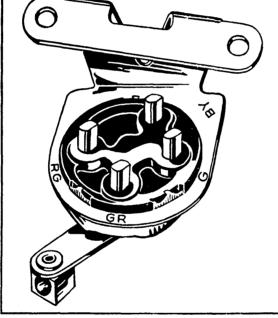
back to align holes and replace Early Type Interlock Switches did not have Terminals marked for Wire Colors. The illustration shows a late Type Switch.
